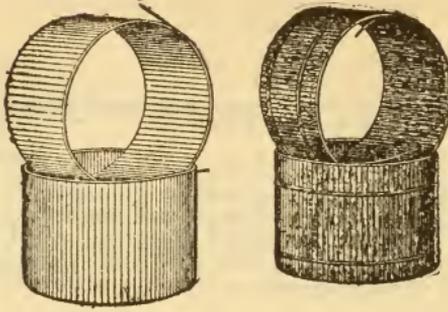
Unfinished and Finished Coils for Core Type Transformers
